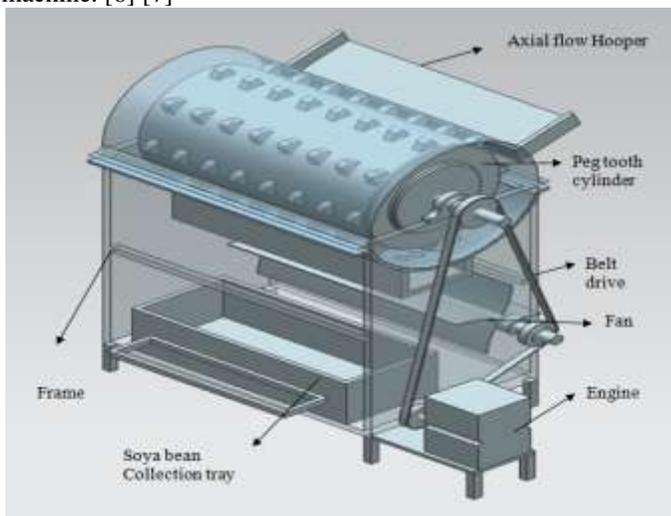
Axial flow, throw in peg tooth cylinder soybean threshing machine
